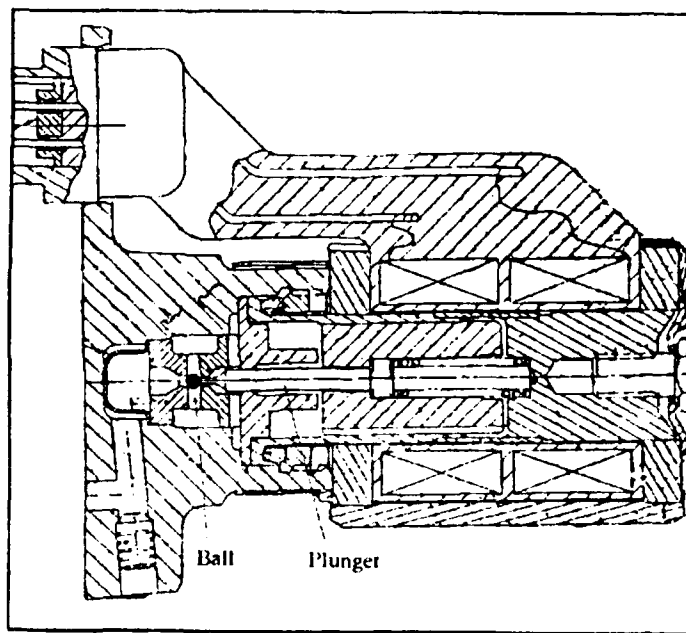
Cutaway drawing of the solenoid valve.
